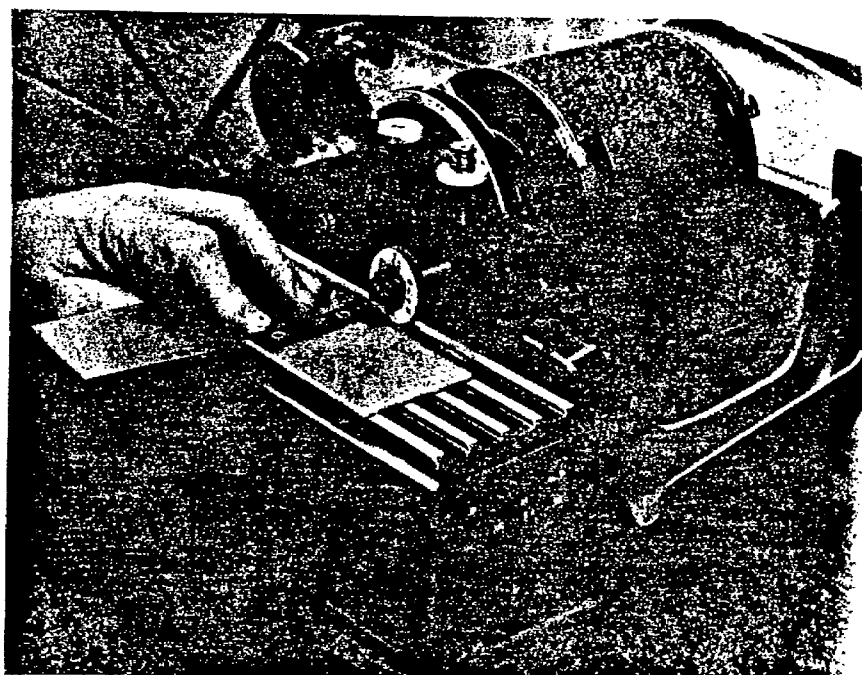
Abrasive wheel stripper (Carpenter Manufacturing Co.).
